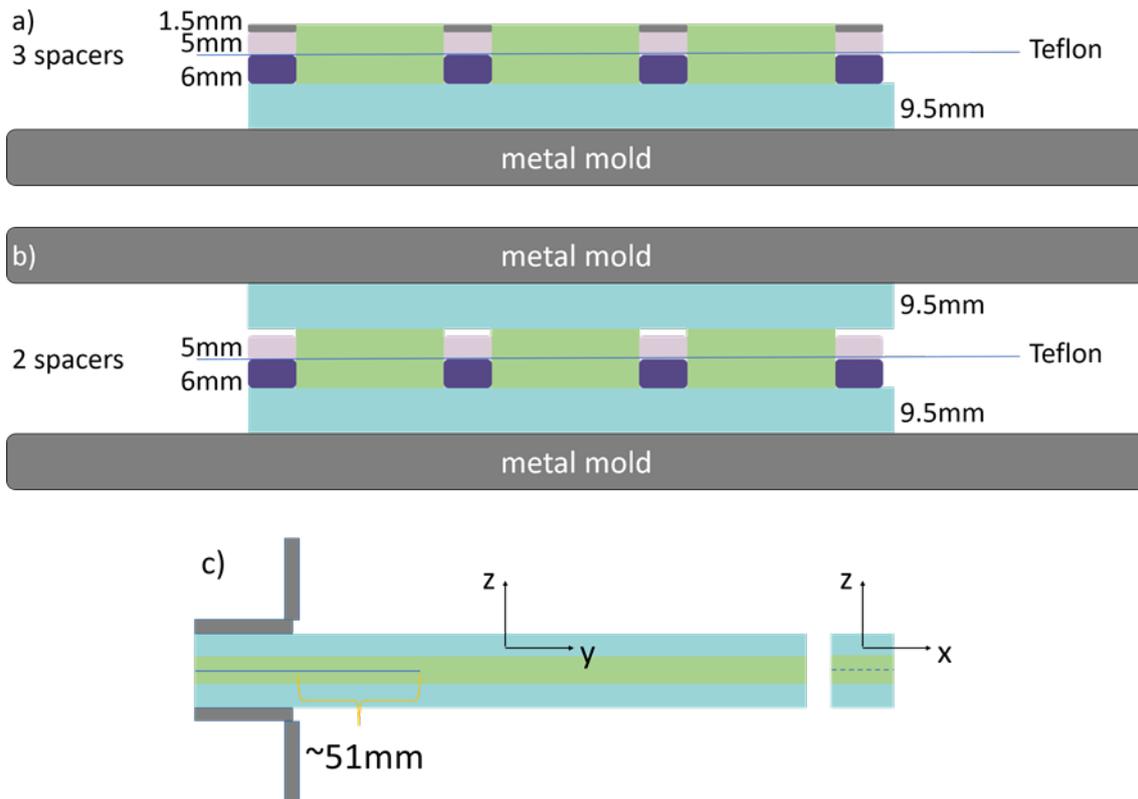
DCB joint production process: a) sketch after placing 3 spacers and controlling epoxy thickness. b) sketch after removing third spacers and placing top adherend and metal mold. c) sketch of DCB adhesive joint with piano hinges.
